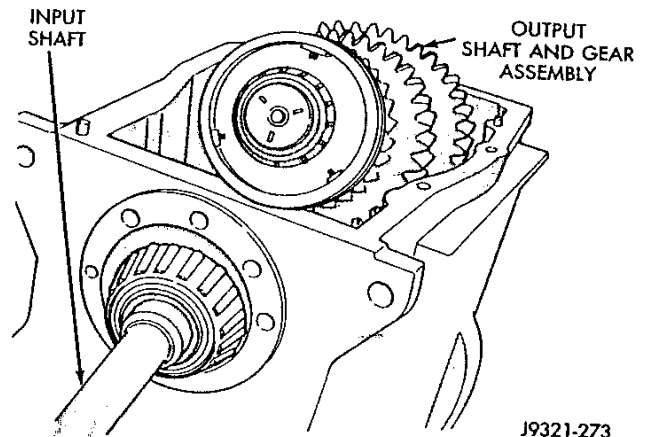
Location Of Input Shaft Clutch Gear Flats
